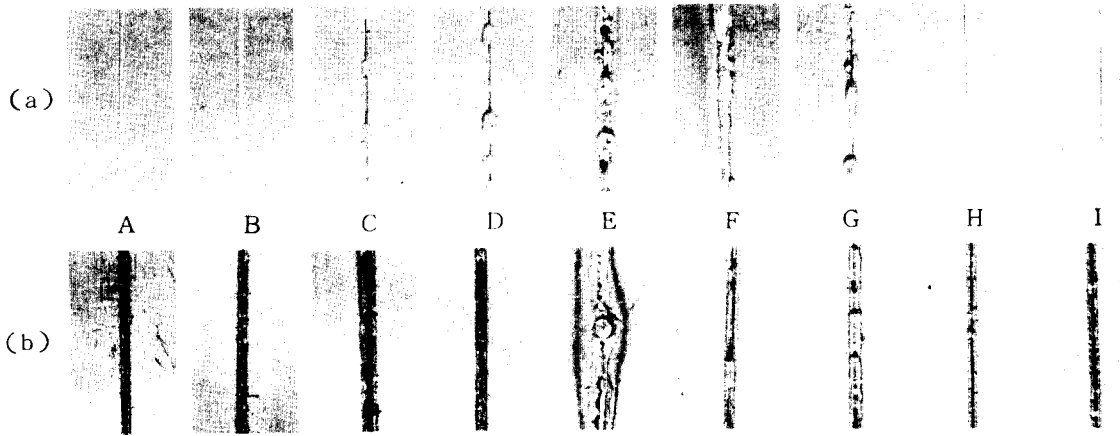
Cut shape on bottom side for various nozzle to workpiece distance of Fig. 7
